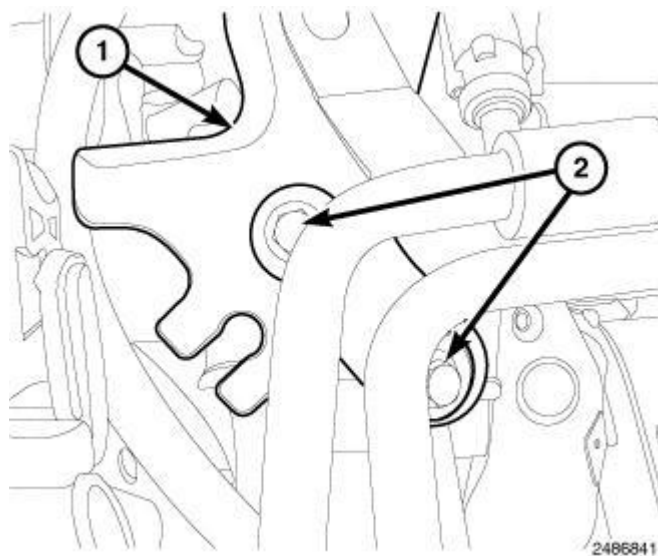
Upper Fuel Line Bracket Bolts
